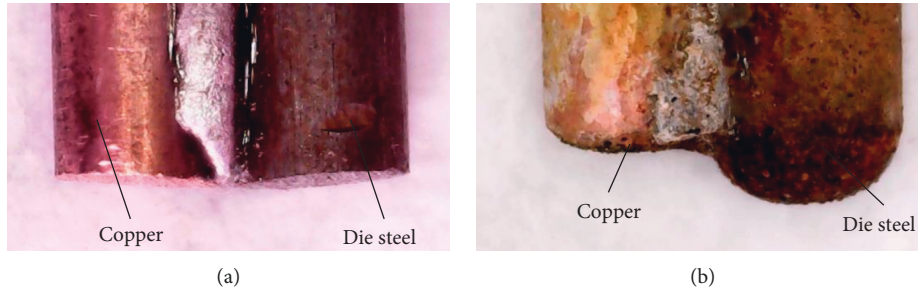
Multimaterial electrodes before and after machining. (a) Before machining. (b) After machining.
